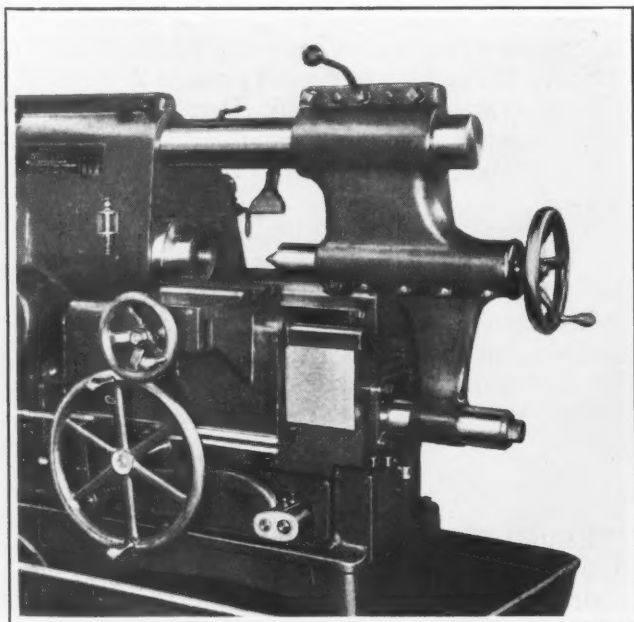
Special 12-inch Stub Lathe for Turning and Facing Differential Carrier Assemblies Similar to the One Illustrated in Fig. 1
